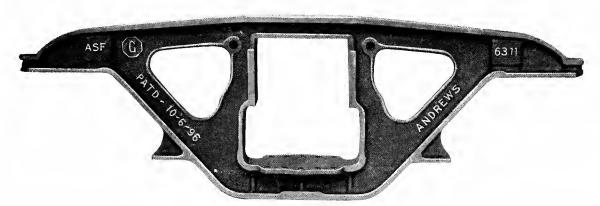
Andrews Cast Steel Freight Car Truck Side Frame for Use with Short Tie Bars. American Steel Foundries.
